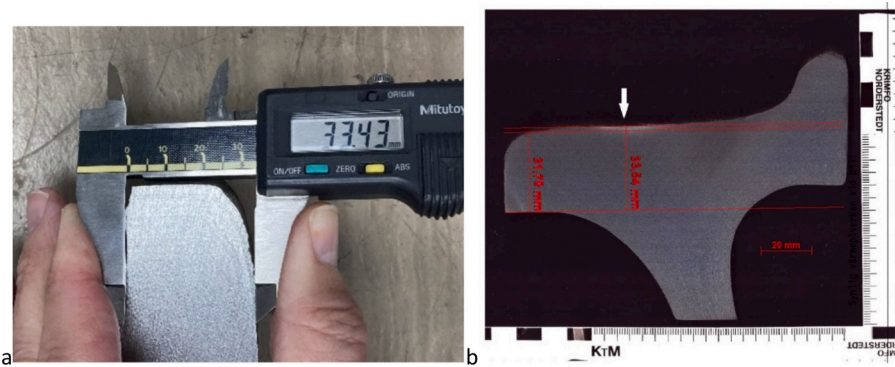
a) rim thickness measurement using a caliper, and b) wheel rim dimensions from image analysis.
